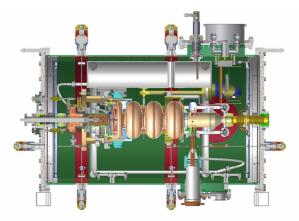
Cut drawing of the SRF gun cryostat.
